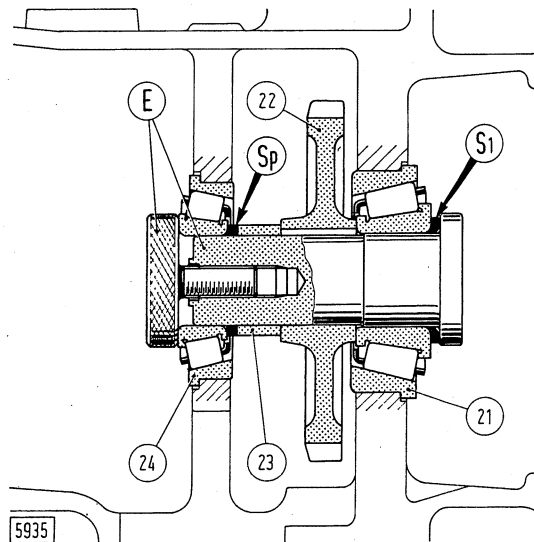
Arrangement of cone centre distance caliper shaft A 137010/B (E).
